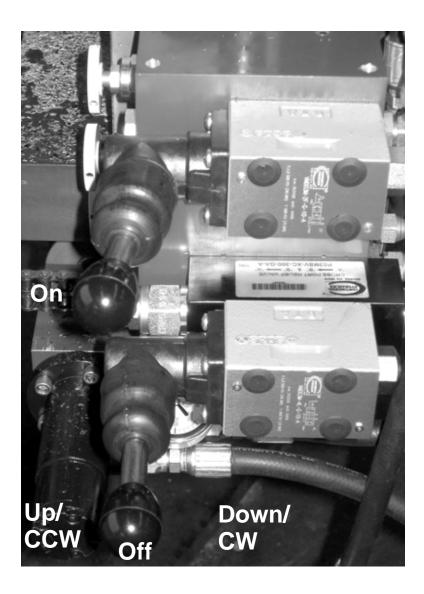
The spindle (cutting) drive is on the top in this orientation (on the shorter manifold block). The motion drive lever is on the bottom (on the taller manifold block).
